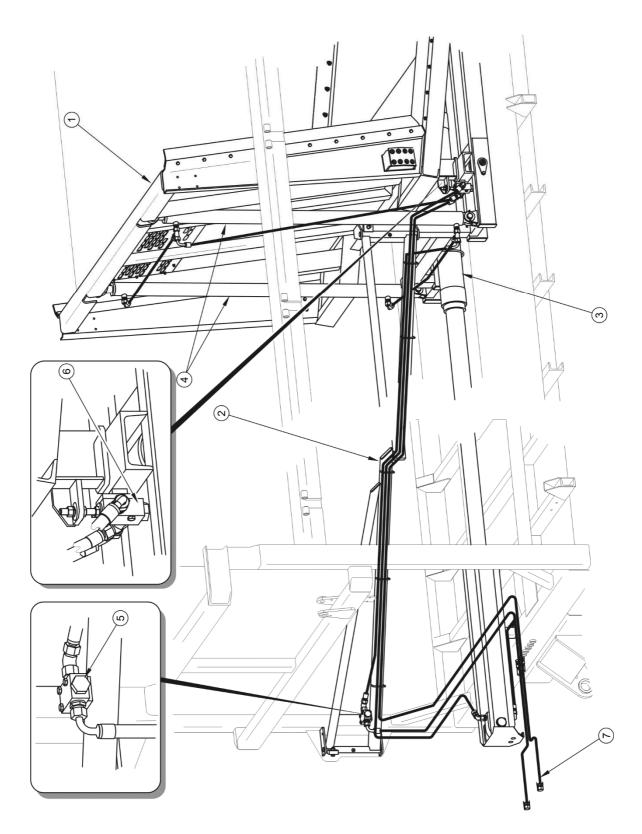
Design of the hydraulic system of the sliding wall
